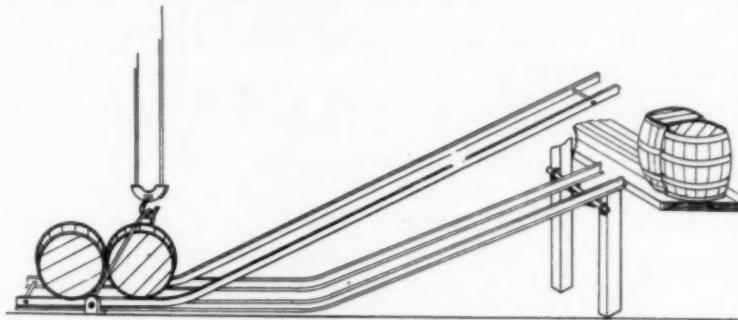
LOADER WITH ADDITIONAL RAILS FOR LOADING SECOND TIER
